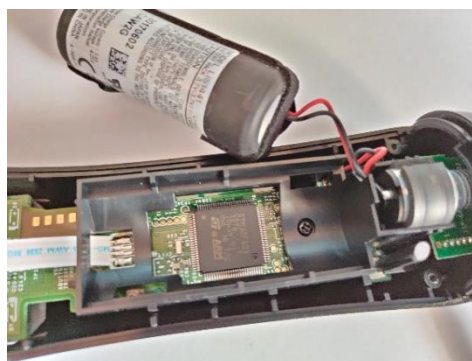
Assembly of the Battery-Vibration Motor sub-assembly on Lid housing
